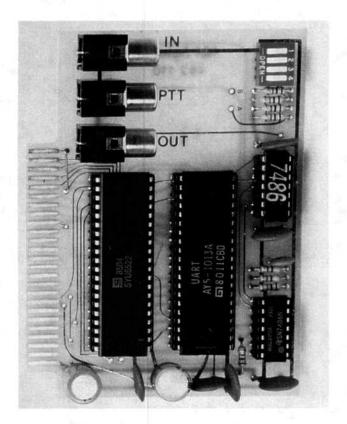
A close up of the A & A Engineering peripheral board.
